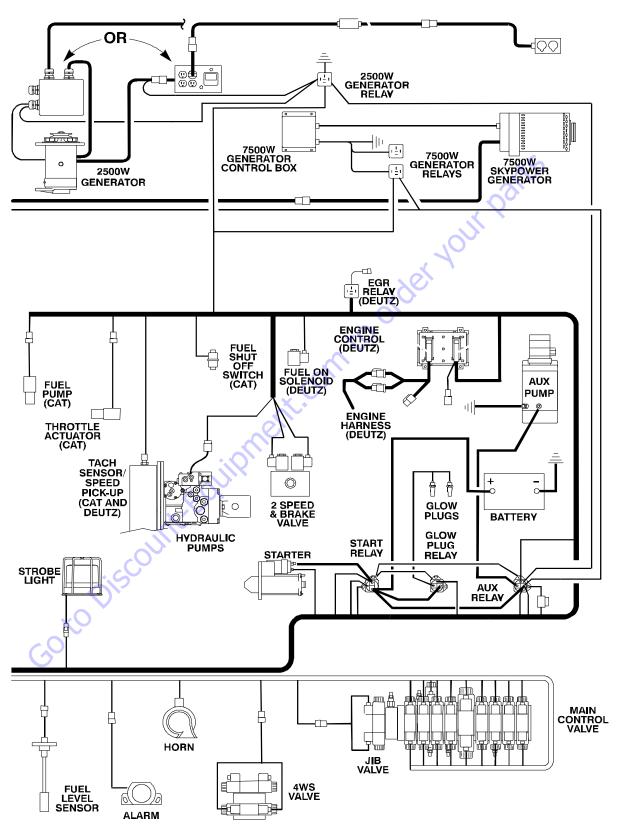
Electrical Components Installation w/ADE (S/N 0300069000 to S/N 0300140000) - Sheet 2 of 2
